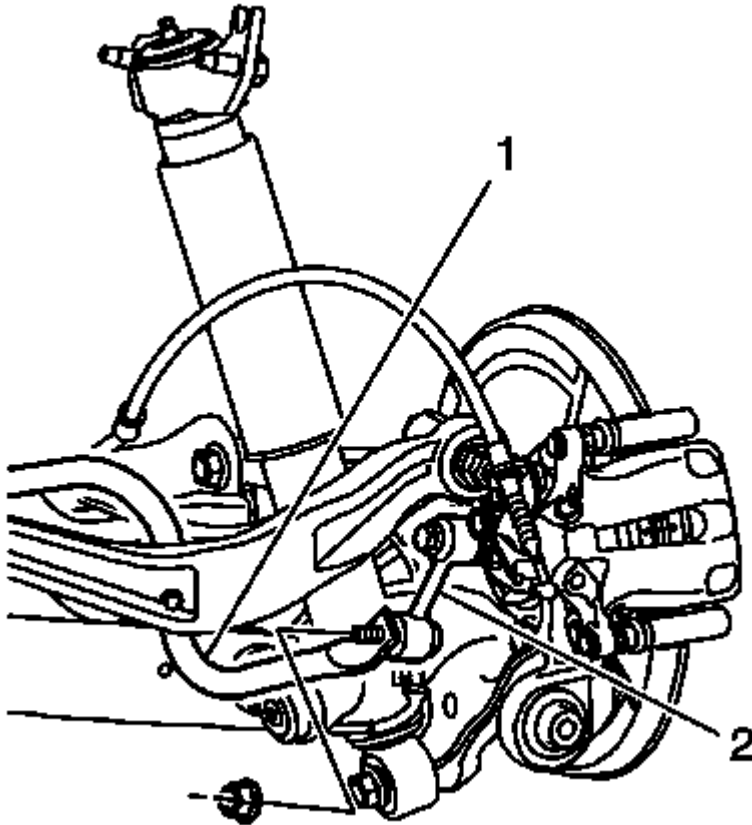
Stabilizer Shaft & Stabilizer Shaft Link
